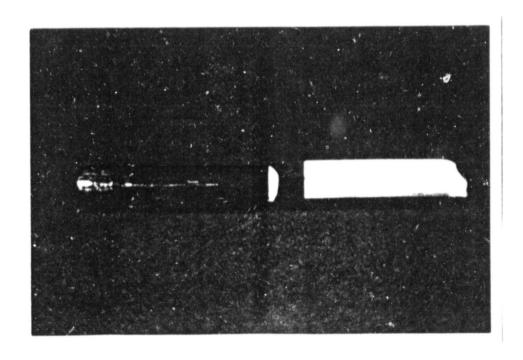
"MACOR" - Inconel bonded sample broken in tension
